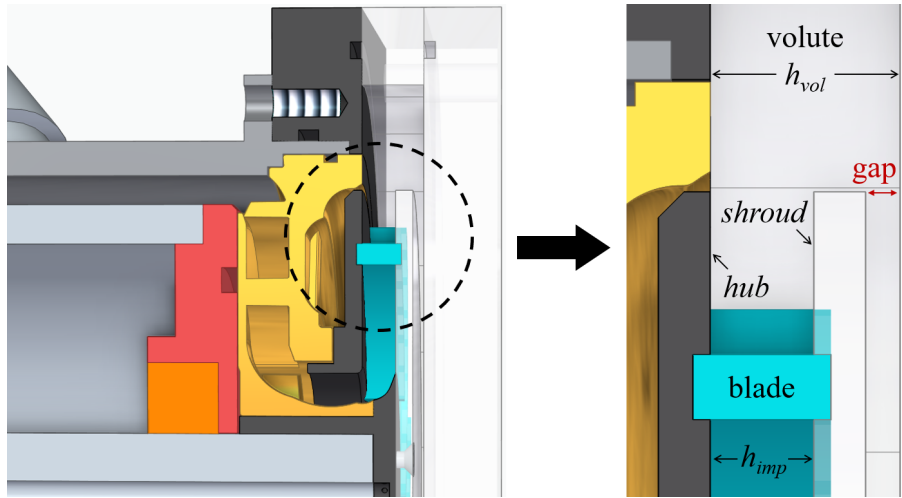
Technical drawing of the pump stage. Cutaway view highlighting the impeller assembled in the volute.
